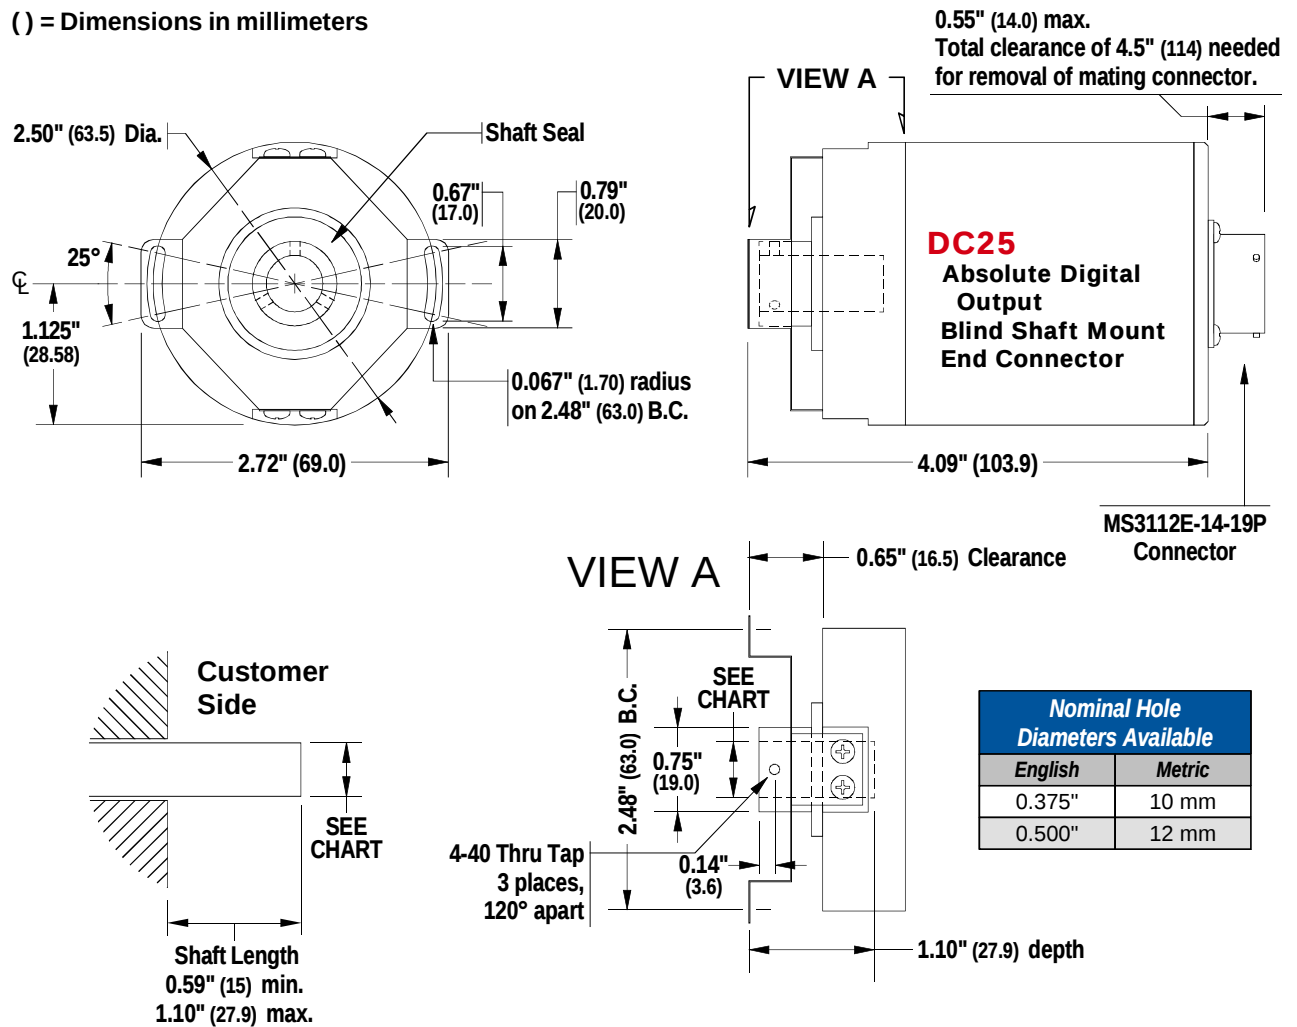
Blind Shaft Mount, End Connect Outline Drawing
